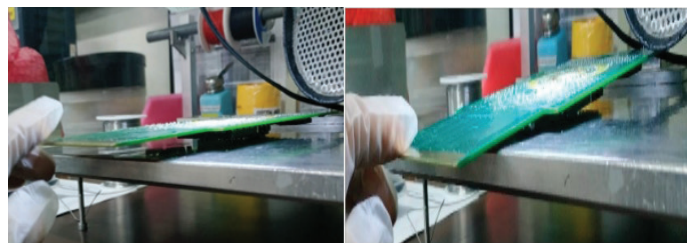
(a) Fixture used in the soldering of needles to PCB (b) inspection of soldered PCB
